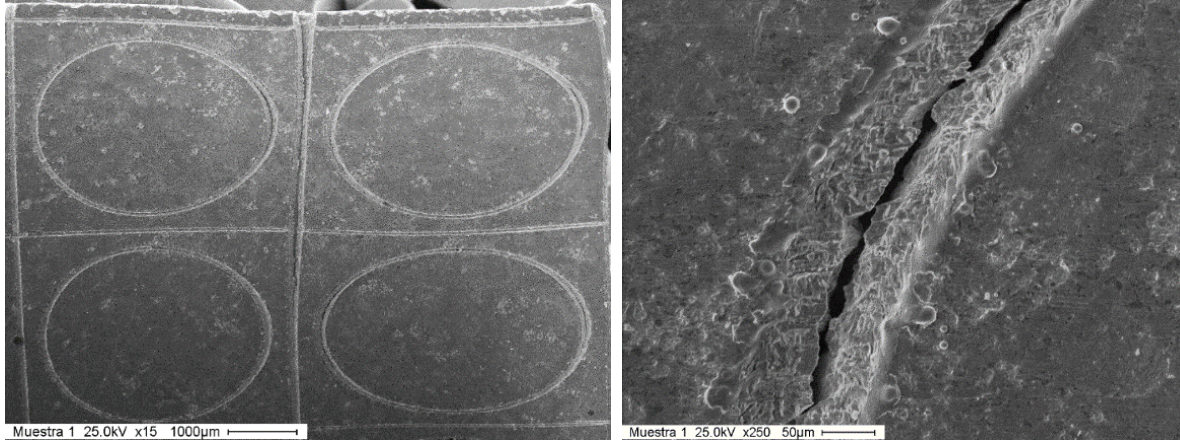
Sector of a tensile specimen tested, with grid in condition M (right) and crack detail
